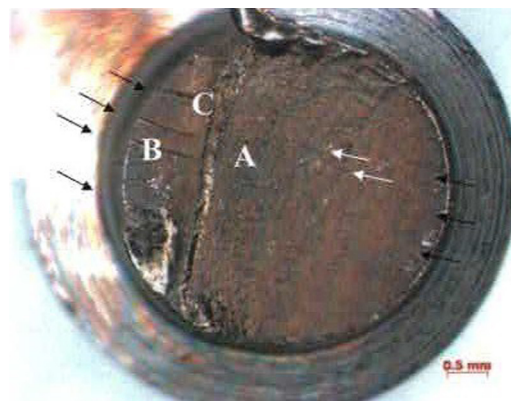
Stereoscopy. Broken screw fracture surface: (A) and (B) fatigue cracks and (C) screw final rupture point [26].
